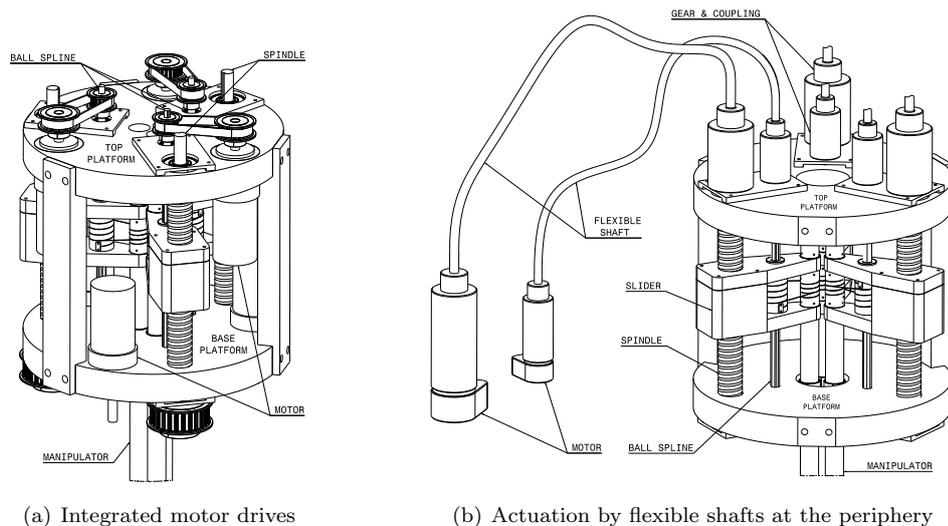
Concepts of the linear and rotary joint of the manipulators: a) Direct drive by motors integrated into the platform b) Actuation of the passive platform mechanism by using flexible shafts.
